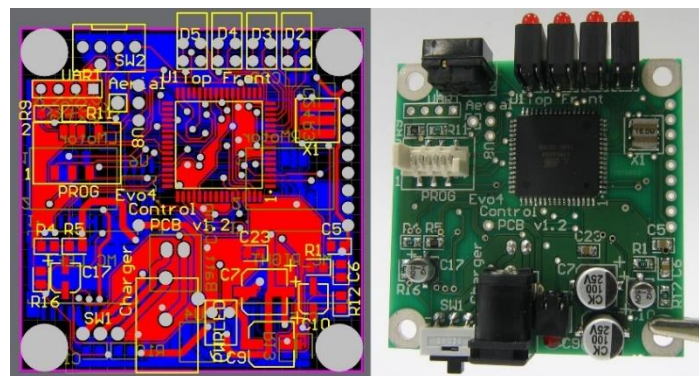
(Left) PCB Layout and (Right) Implementation of Design
